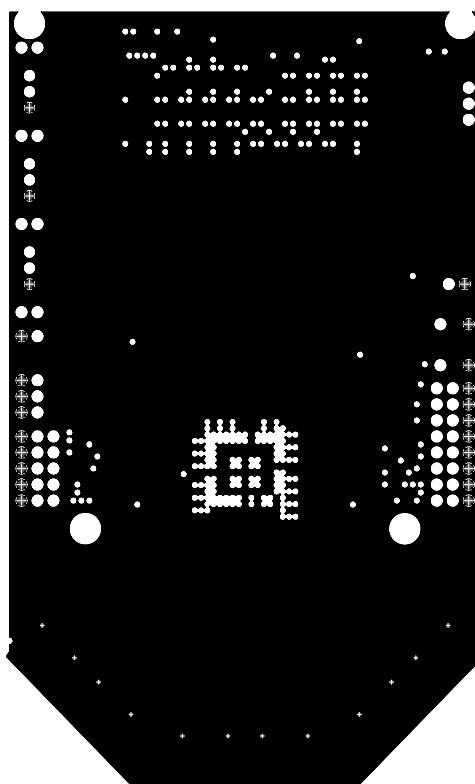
Si5100-EVB Layer 4—GND2 Plane (Daughter Card)
